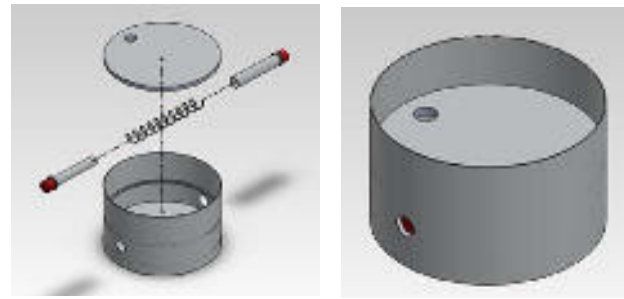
A) Exploded View of Canister Cap (left) B) Collapsed View of the Canister Cap (right)
